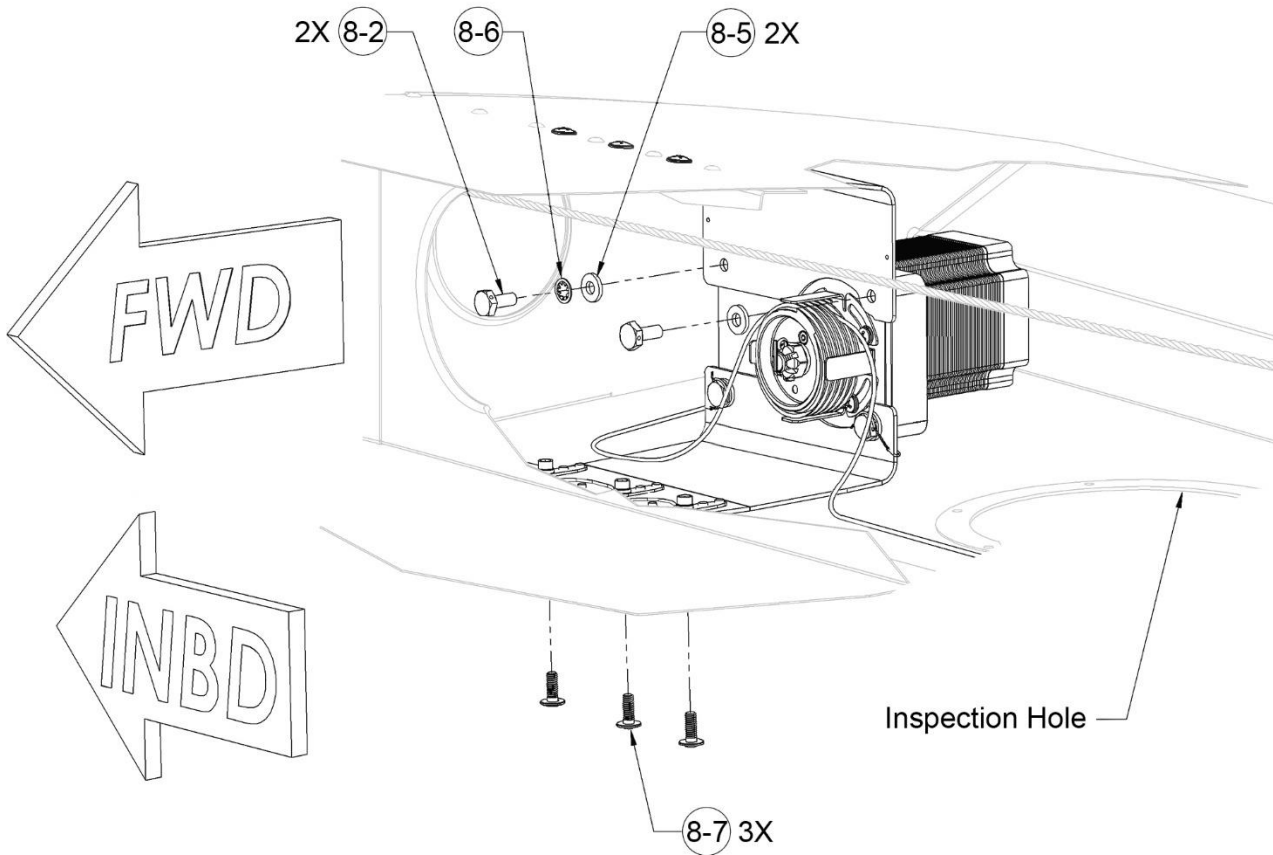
Inserting Roll Servo / Lower Bracket Assembly
